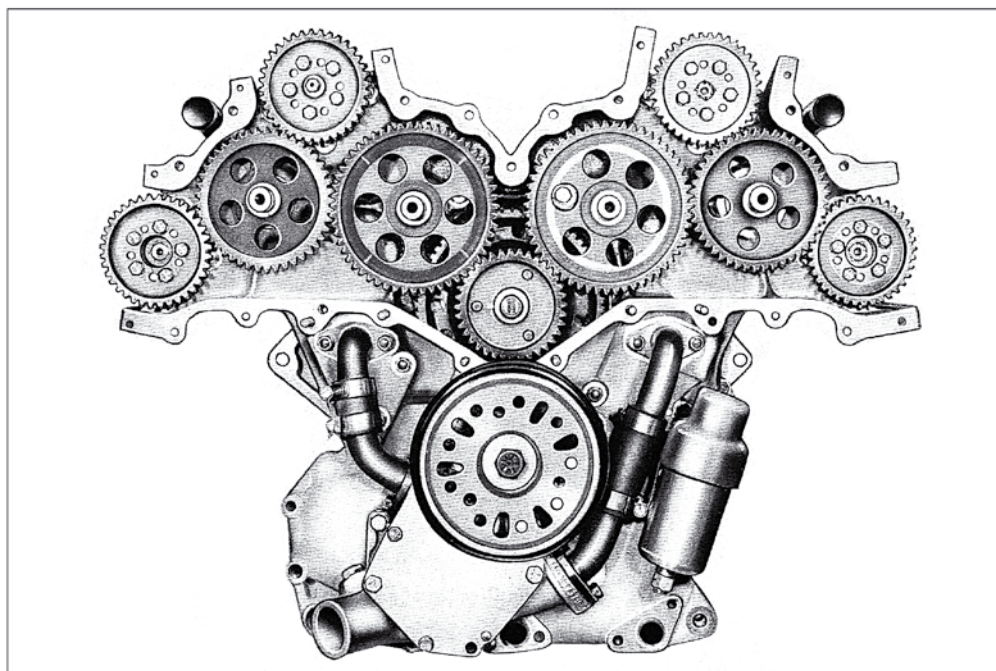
The Camshaft and Accessory Drive Gear Train for the Ford D.O.H.C. Engine
